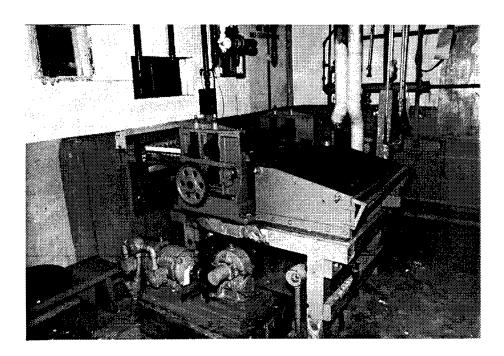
Building 6808-5: Slitting machine manufactured in 1944 by Bagley and Sewel Company. This model is a floor type, semi-automatic, with a warming tray.
